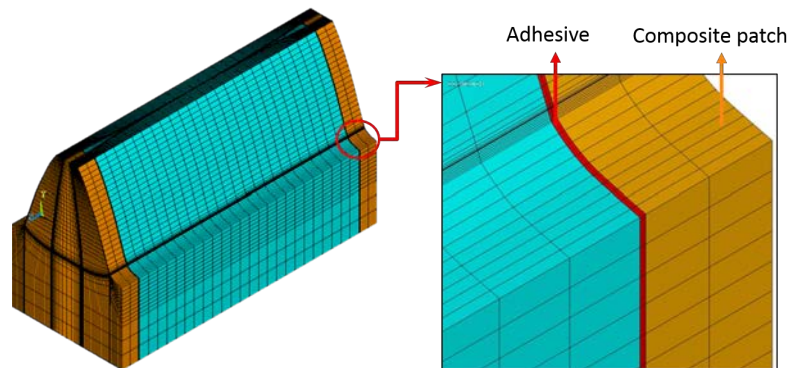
Typical meshing of the repaired gear tooth with composite material.
